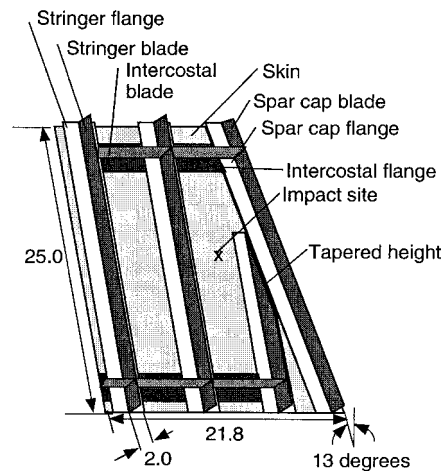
Geometry of a multistring panel. Length dimensions are in inches.
